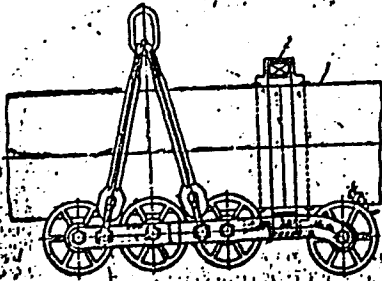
1 - welded pipe; 2 - annular welding transformer; 3 - holding roller; 4 - supporting roller; 5 - frame; 6 - hydraulic storage cell; 7 - hydroelectric drive mechanism; 8 - rod; 9 and 10 - trunnions; 11 - insulator; 12 - forward rollers
